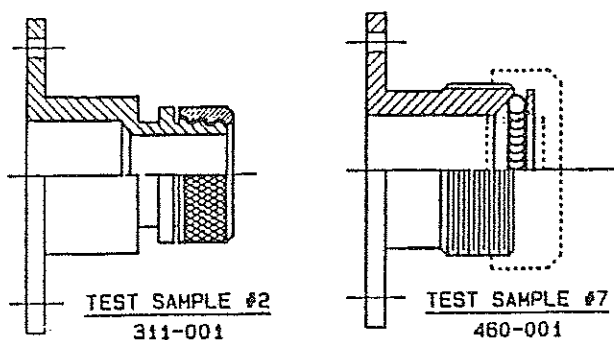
RF/EMI Backshell Termination Test Samples that Used Large Screw Threads or a Circular Coil Spring for Attaching the Shield Braid.
